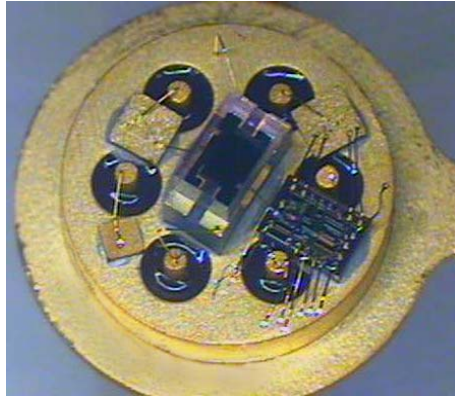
Tunable receiver on a TO46 header prior to cap welding.
